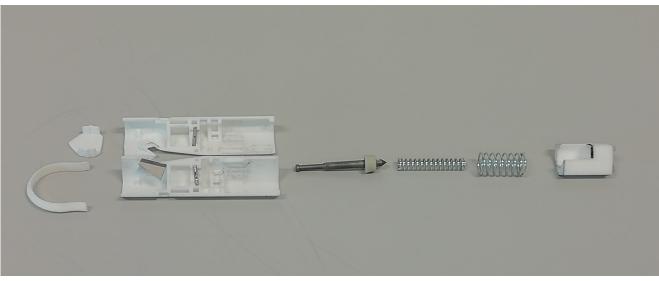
Exploded view of the final prototype (SLS 3D printed). Internal parts were "borrowed" from Swisstech.
